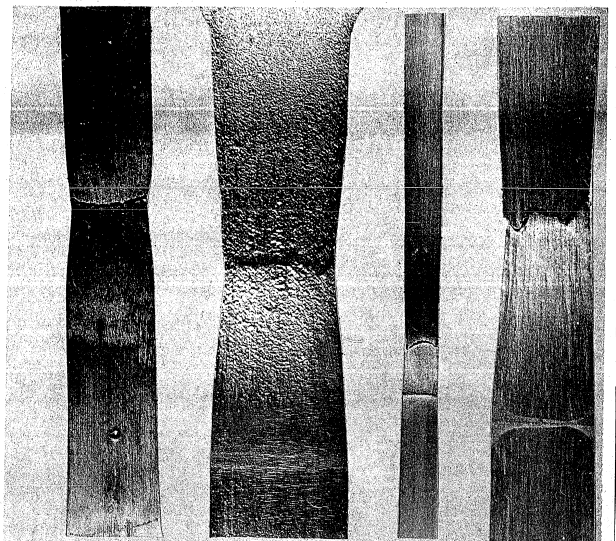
TYPICAL FRACTURES OF WELDED TEST BARS USED IN THE MAXIMUM TO MINIMUM RIB RATIO STUDY.
